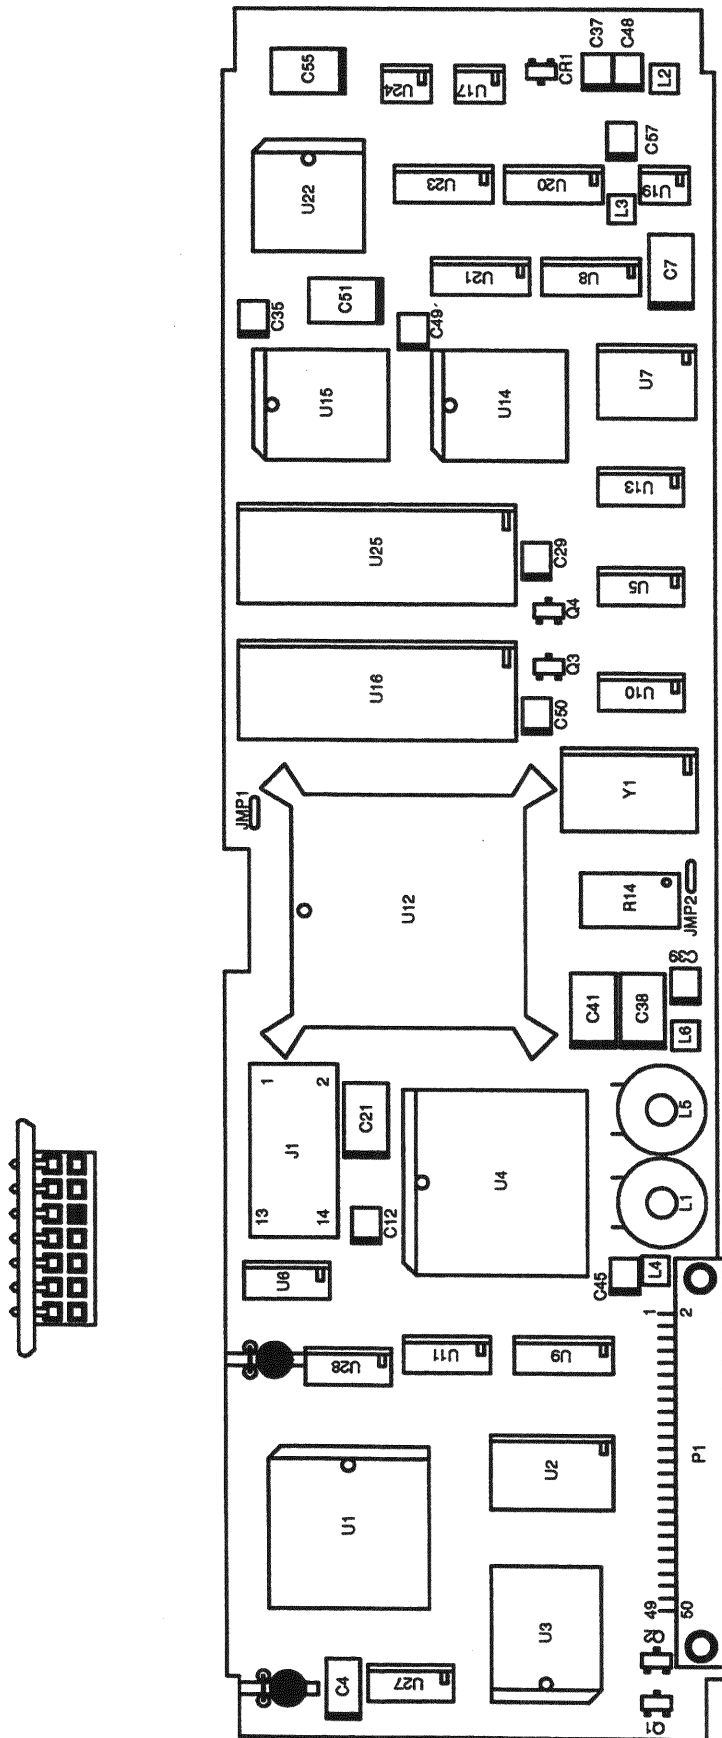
A3 LPC PWB Assembly Component Location Diagram (10372-3440 Rev. A) (Sheet 1 of 2)
